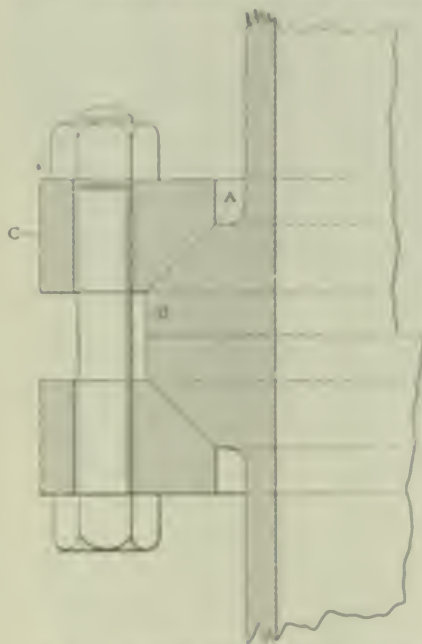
WELDED JOINT WITH LOWER TAPERED RING FLANGE.
